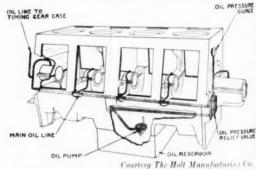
Diagrammatic view of a tractor engine lubricating system towing oil lines, etc.
